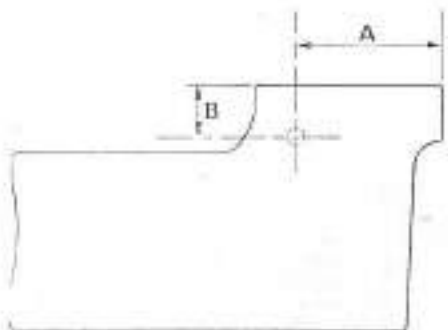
Early transmission side cover can be carefully modified by drilling a hole at location indicated. Tap hole for 1/4-inch or larger pipe plug. Hole is on right side of cover. Distance (A) from front is 11-1/16 inches; distance (B) from top surface is 2-5/16 inches.
